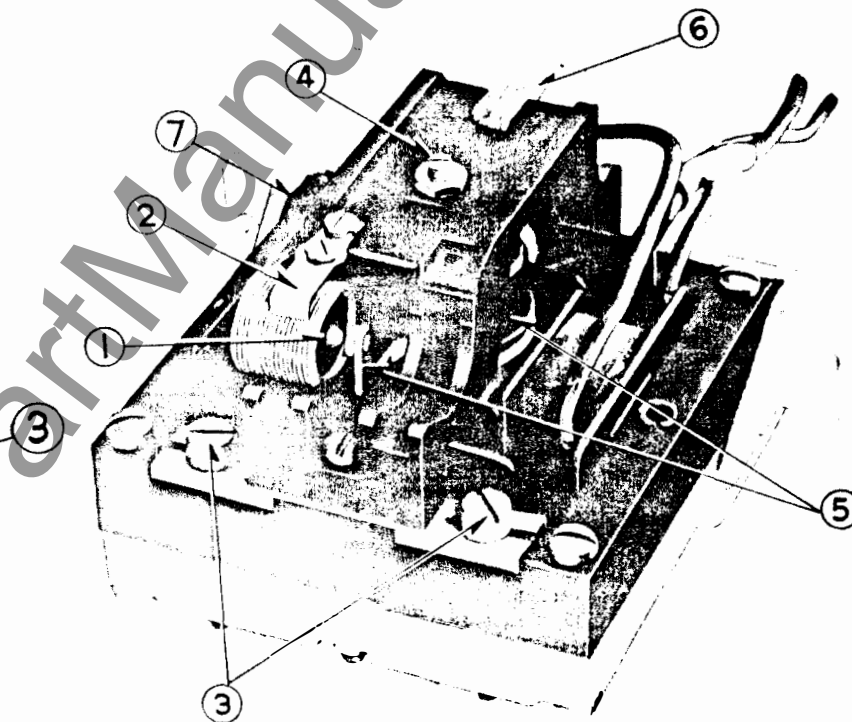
Directional Unit. 1-Stationary Contact. 2-Stationary Contact pressure spring. 3-Magnetic adjusting plugs. 4-Upper bearing screw. 5-Moving element assembly. 6-Spring adjuster clamp. 7-Current Bias Vane.
